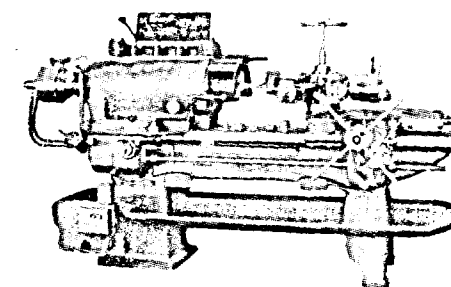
No. 7 Fusible Plug Capstan Lathe fitted with air operated two jaw chuck.
